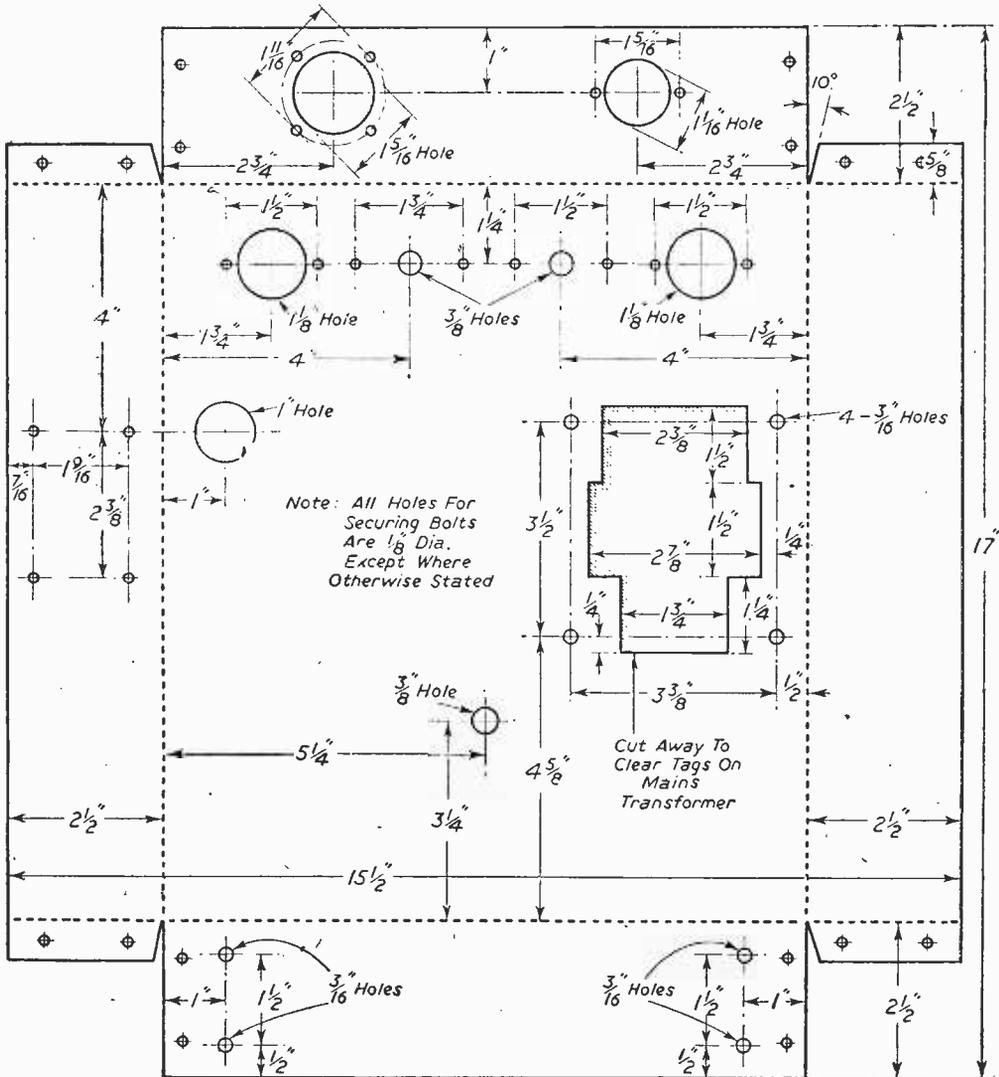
Cutting and drilling data for the chassis of the mains unit.
